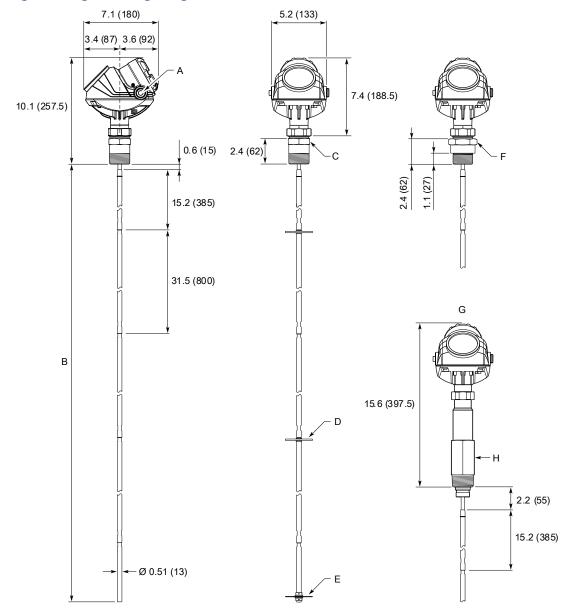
Segmented Rigid Single Lead Probe with Threaded Connection
